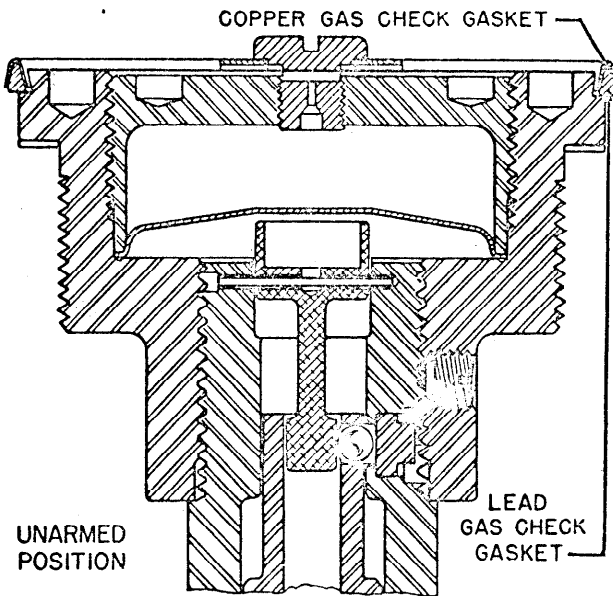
Base Fuze Mk 159 Mod 1, Unarmed Position Showing Gas Checking.
